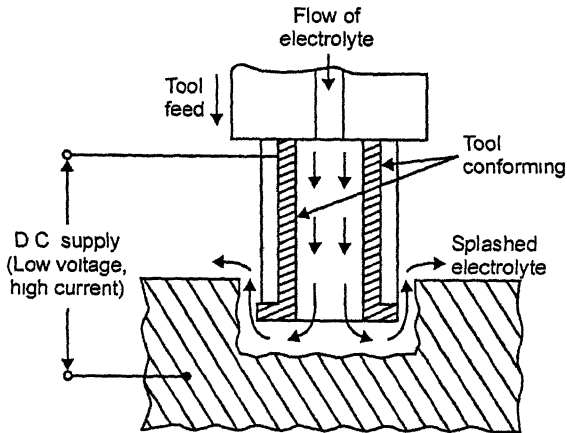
Set up for Electro-Chemical Machining (ECM).
